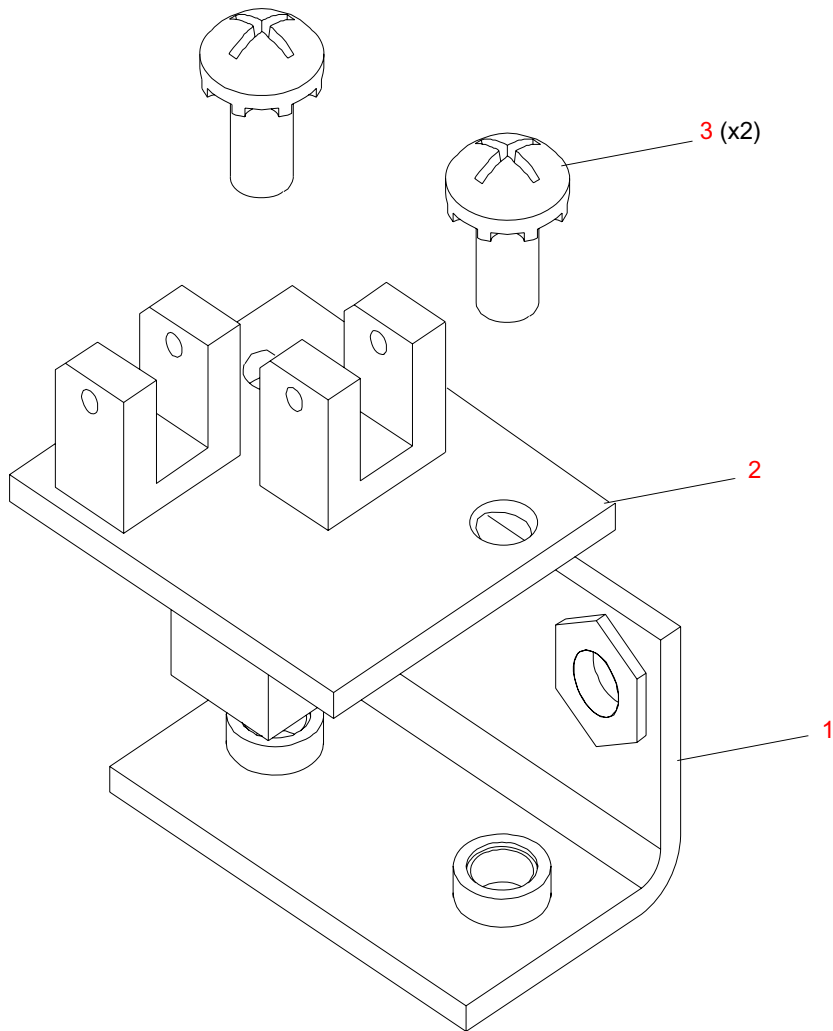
Color Sensor #1 PCB Mount Assembly
